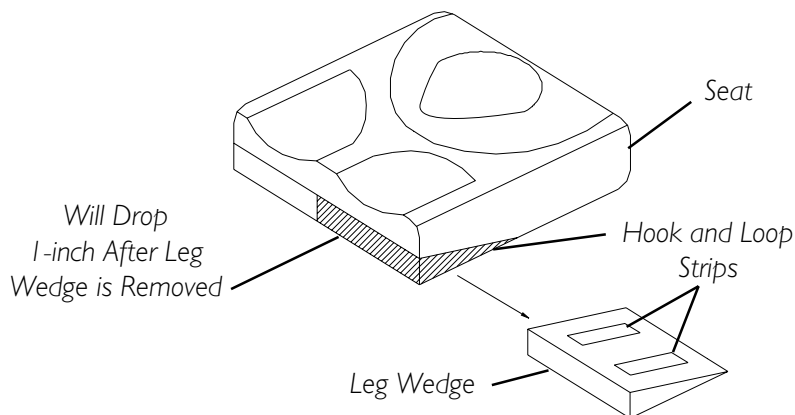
OPTIONAL REMOVABLE LEG WEDGES
